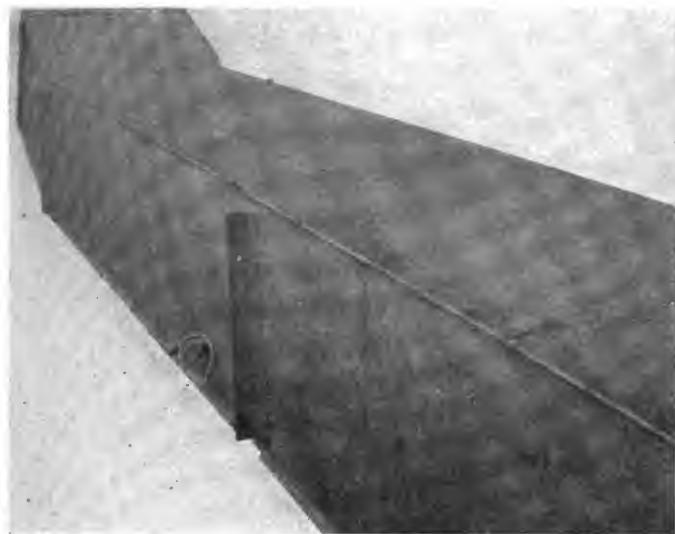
Near view of electric arc welded seams on steel chute for metal chips
